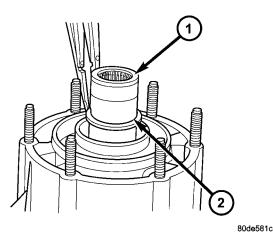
Remove Input Gear Retaining Ring 1 - INPUT GEAR
